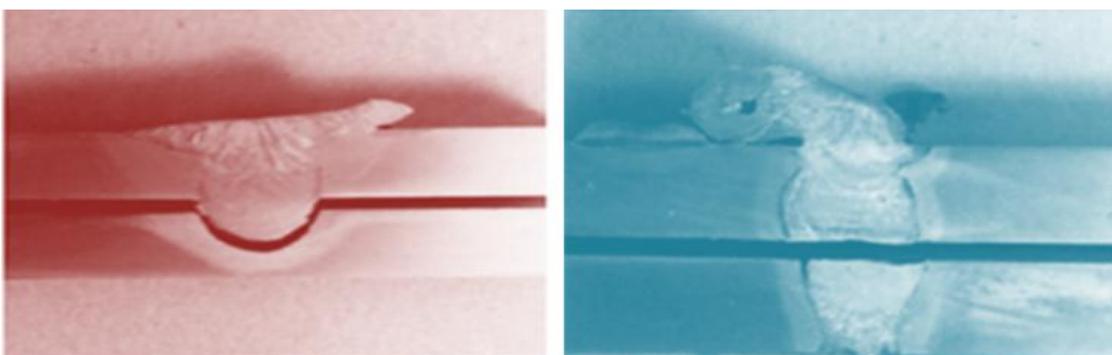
Macro-photograph for welds D1 (left) and W1 (right) conducted by Welder D [11].
